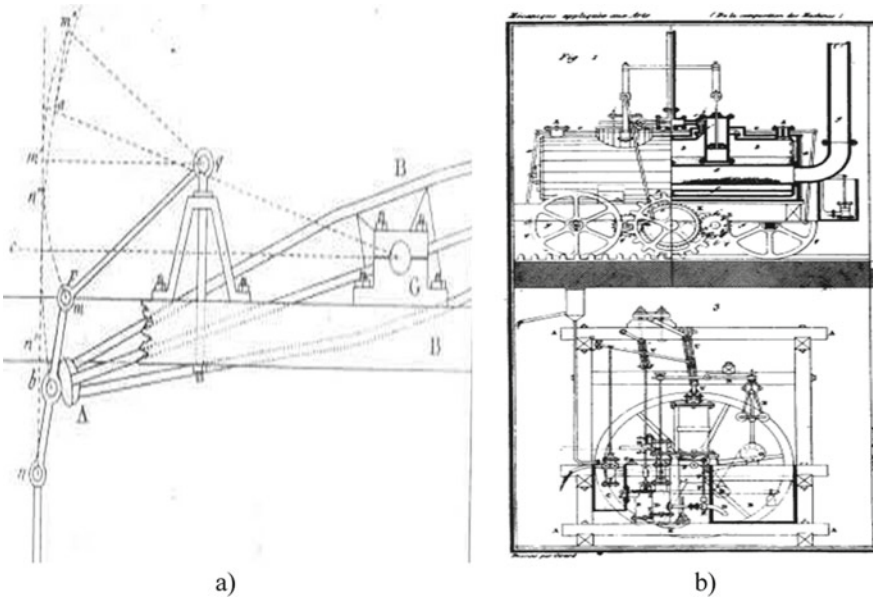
An example of innovation by a four-bar mechanism: a the Watt mechanism design for linear guiding of steam engine piston; b application of the steam engine with Watt mechanism in locomotive at the beginning of Industrial Revolution
